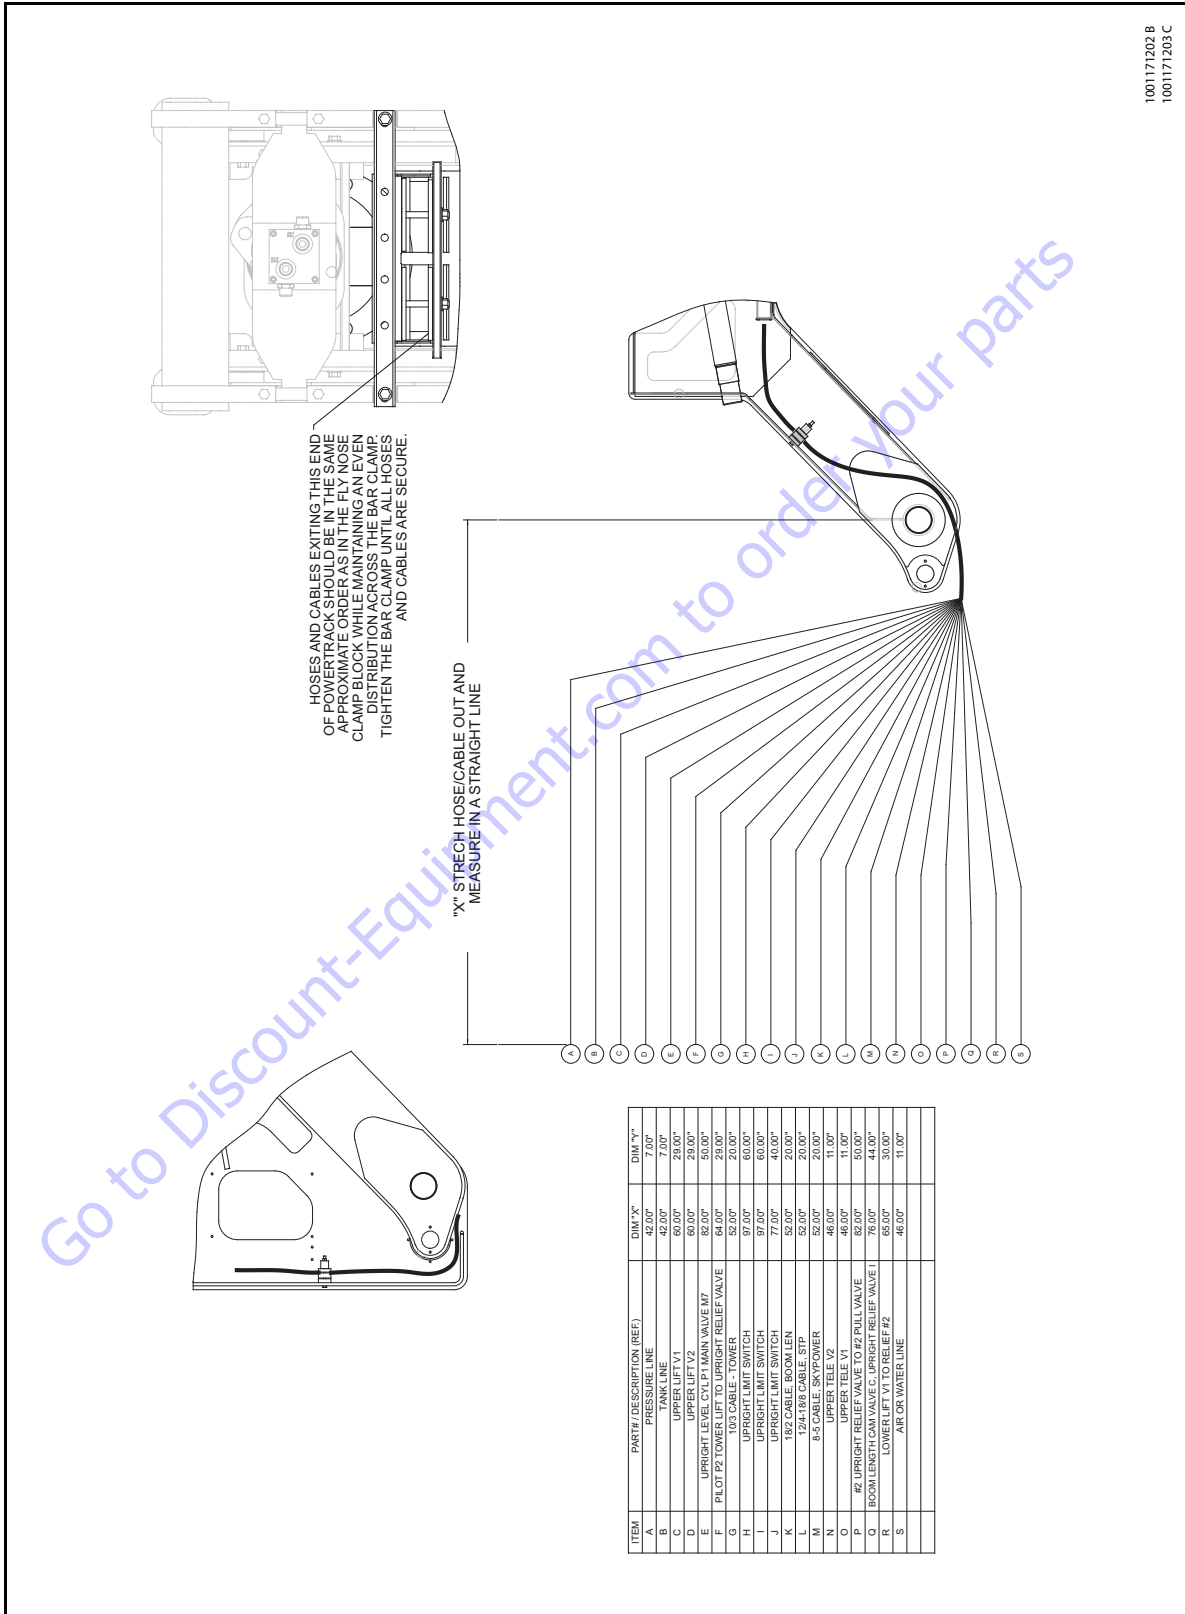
Powertrack Installation Tower Boom (Sheet 2 of 3)
